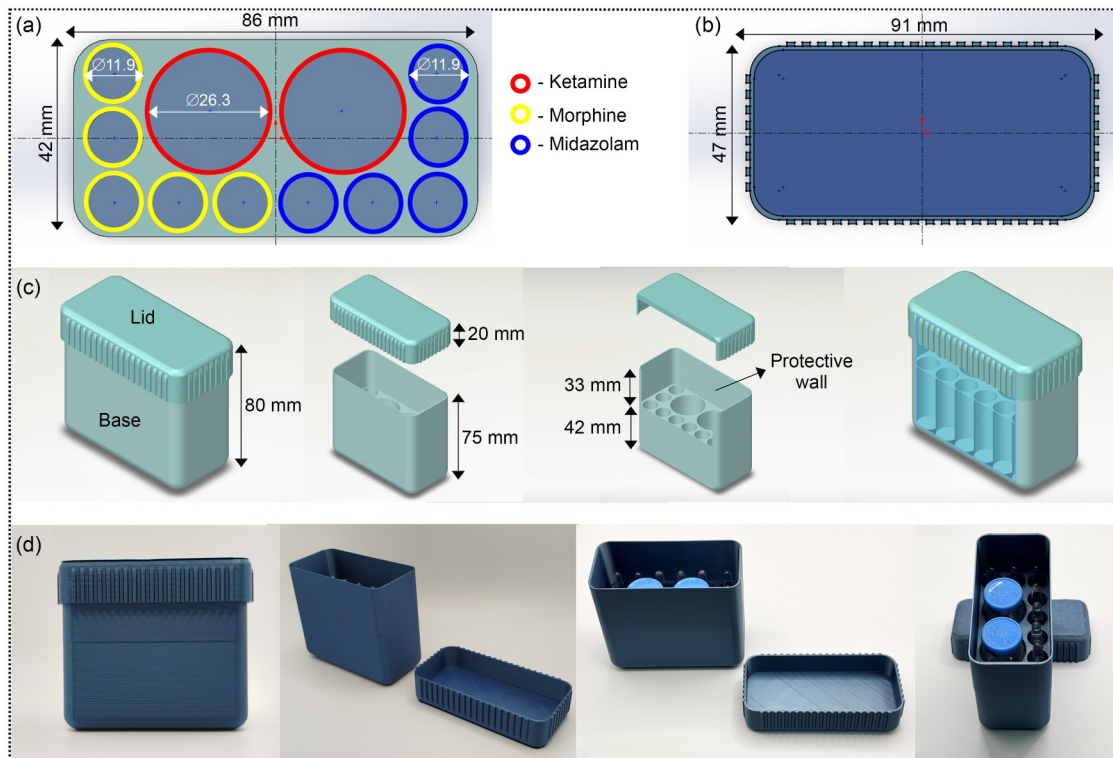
Prototype 1 design and fabrication. (a) Top view of the base shows the ampoule configuration. (b) Top view of the lid highlights key design features. (c) Complete case design with labeled reference dimensions. (d) 3D-printed Prototype 1 fabricated using PLA+
